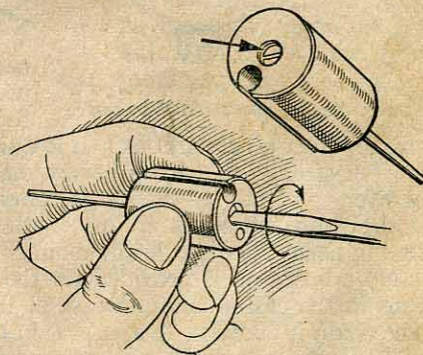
Adjustment of the needle fitted to the Villiers throttle slide
